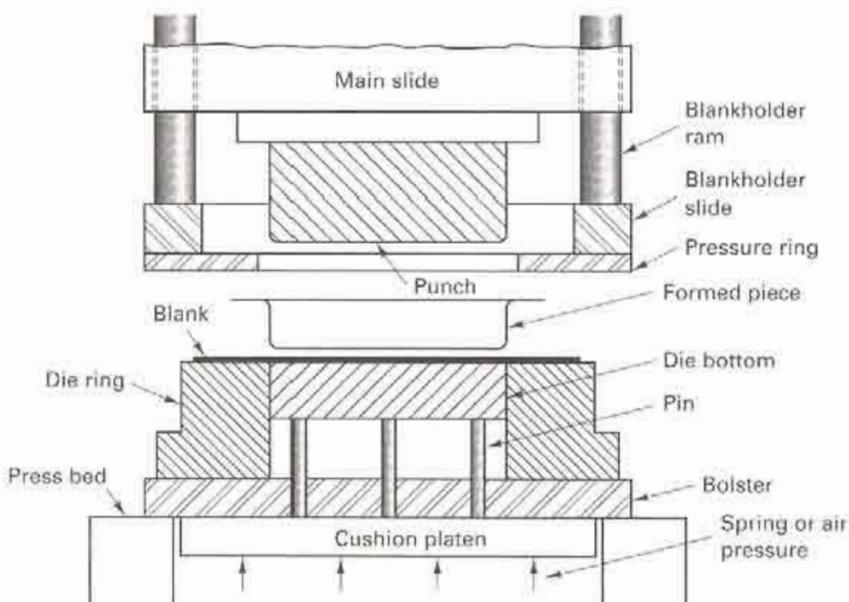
Drawing on a double-action press, where the blankholder uses the second press action.
